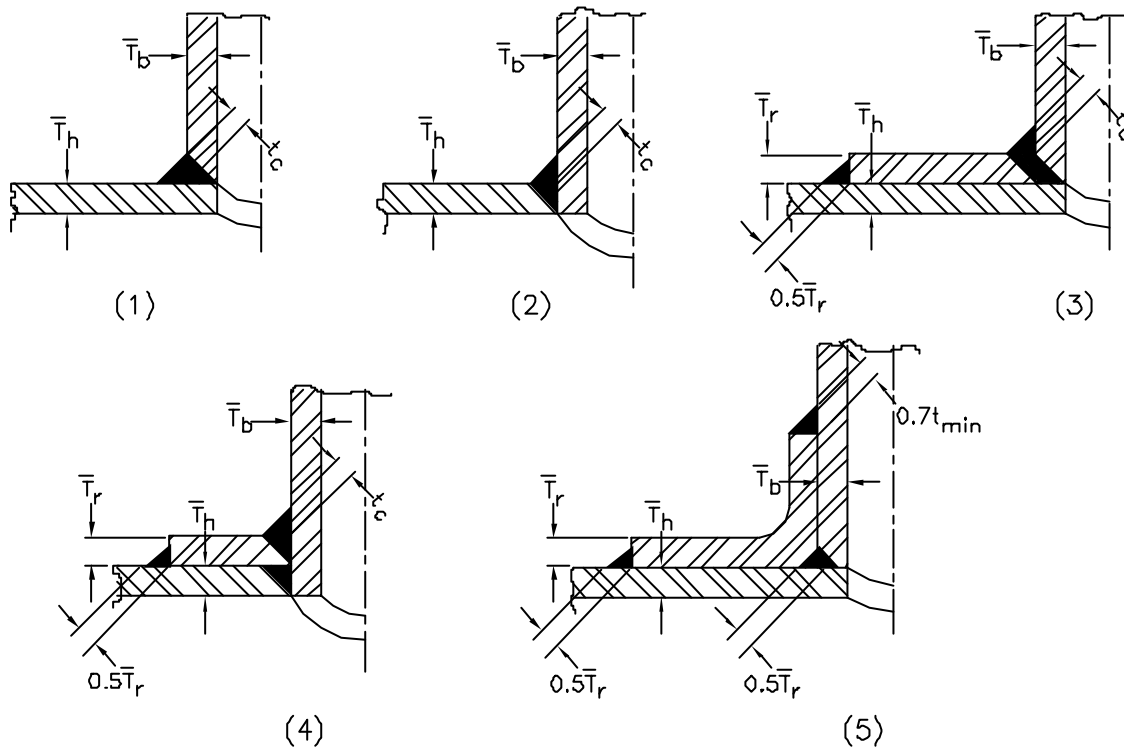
A,B,C. TYPICAL WELDED BRANCH CONNECTIONS
